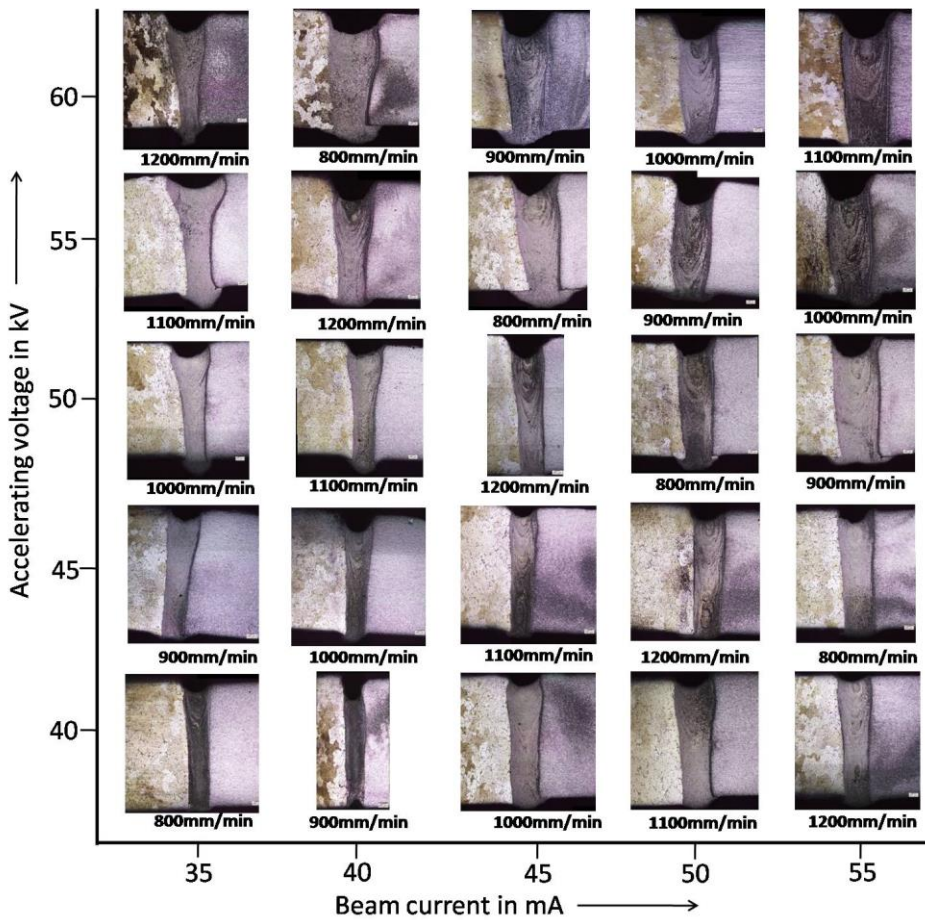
Optical macrographs of the EB weld joints at different welding parameters
